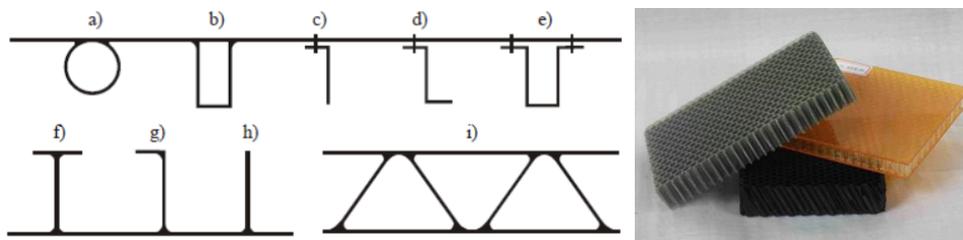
Rib structure and sandwich structures as stiffening (Klein, 2013)
